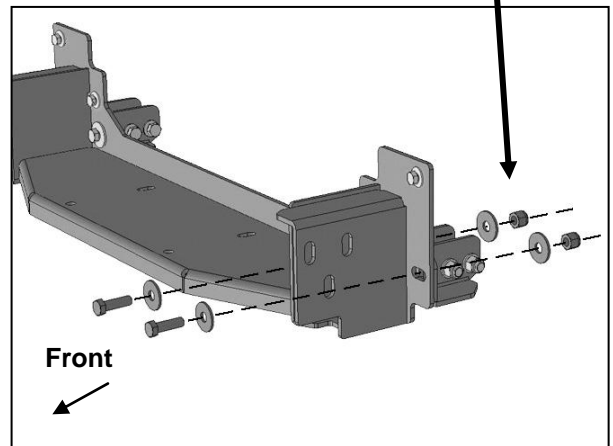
Driver/left outer Support Bracket mounting location (was tow hook mounting location)
